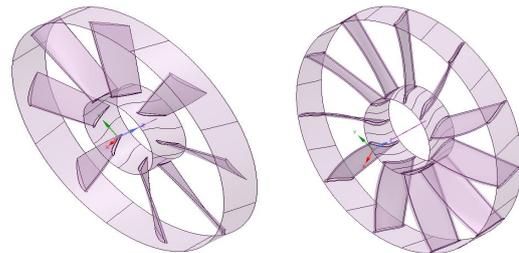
Optimal variable-pitch fan design (left: rotor blade, right: stator blade)
